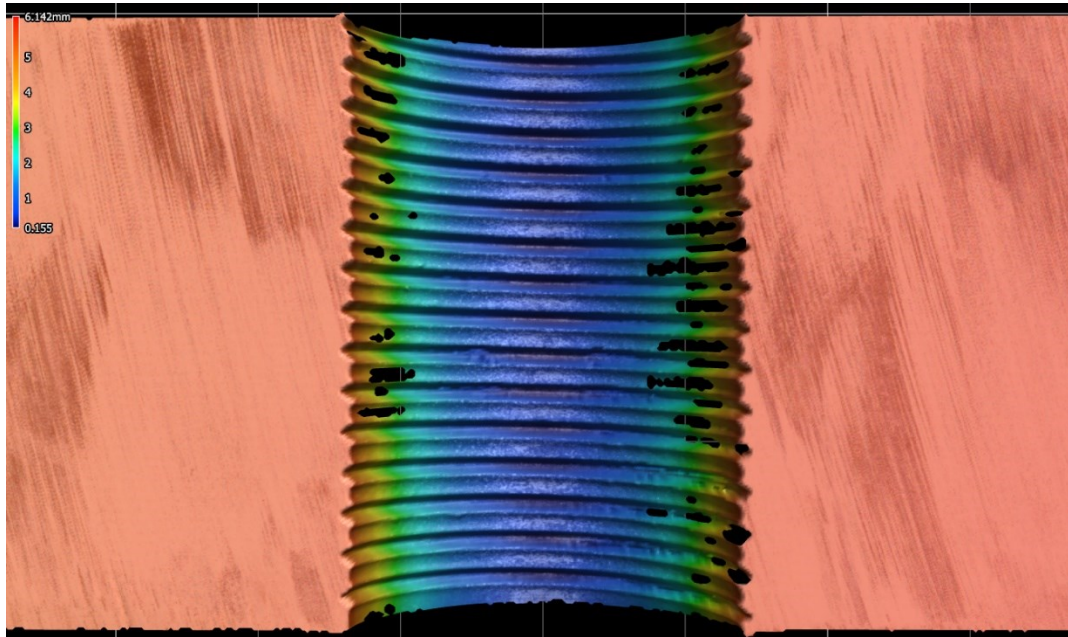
Specimen 8A hole 13 cross section 3D scan.
